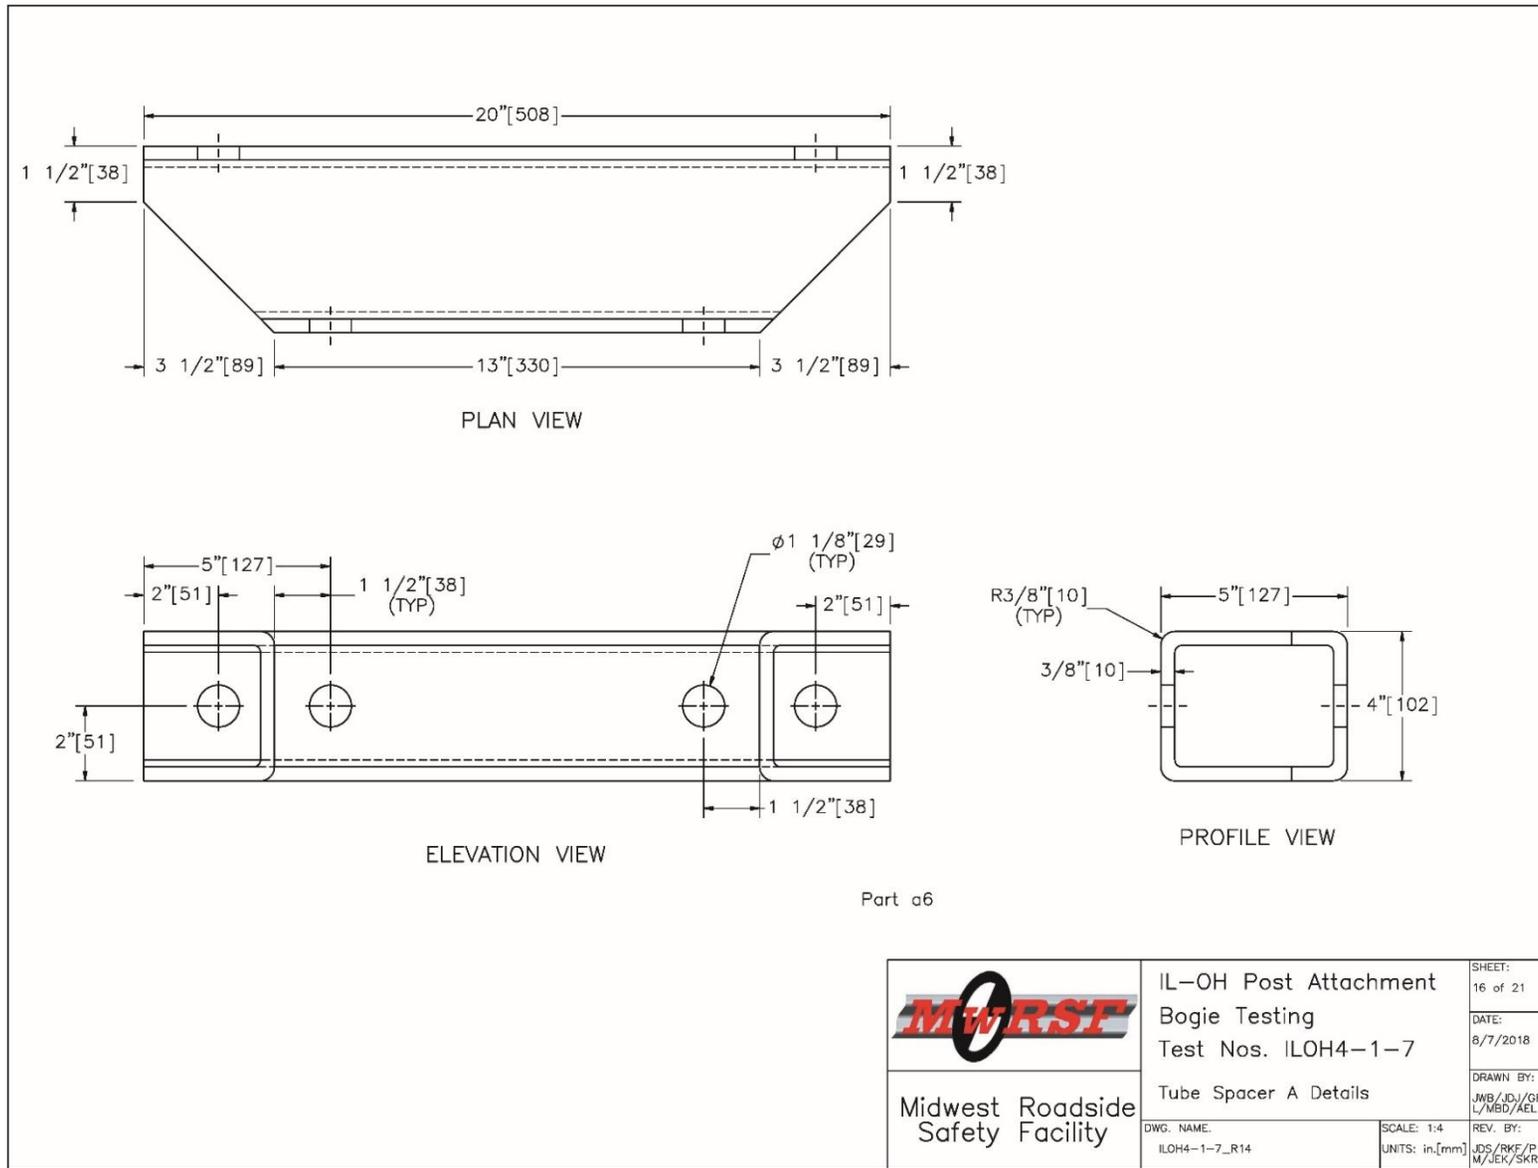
Tube Spacer A Details, HSS5x4x3/8
